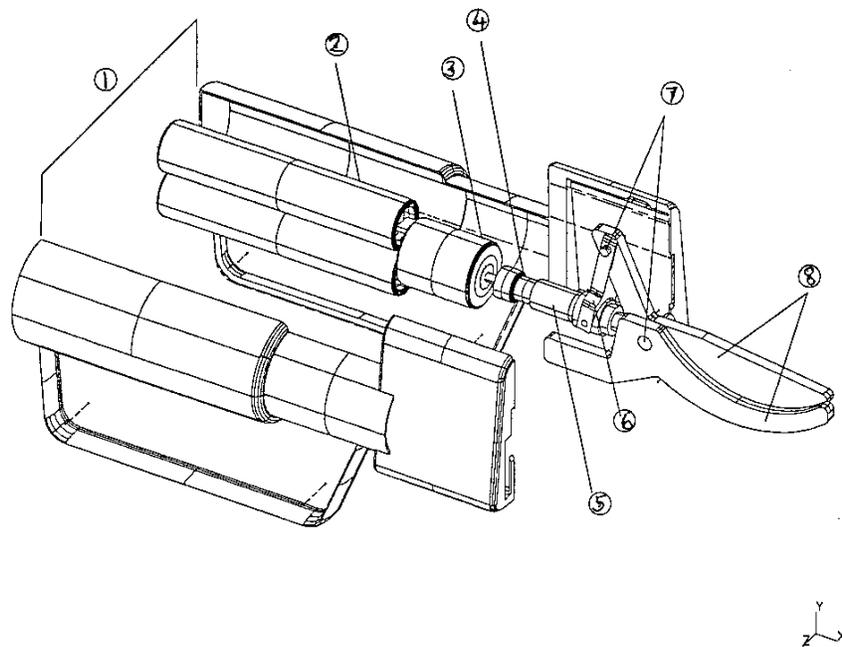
Exploded view of anvil type cutter (note lack of any safety features)
